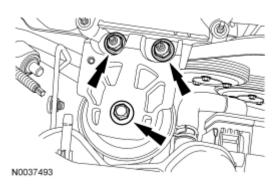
Locating Transaxle Mount Bolts Courtesy of FORD MOTOR CO.
